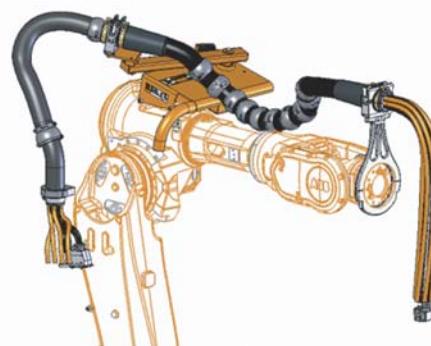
DressPack Upper arm, external with retract arm. Axis 2 to 6, Spot Welding and Material Handling (option 778-1 (778-2), option 780-2 and option 798-2).
